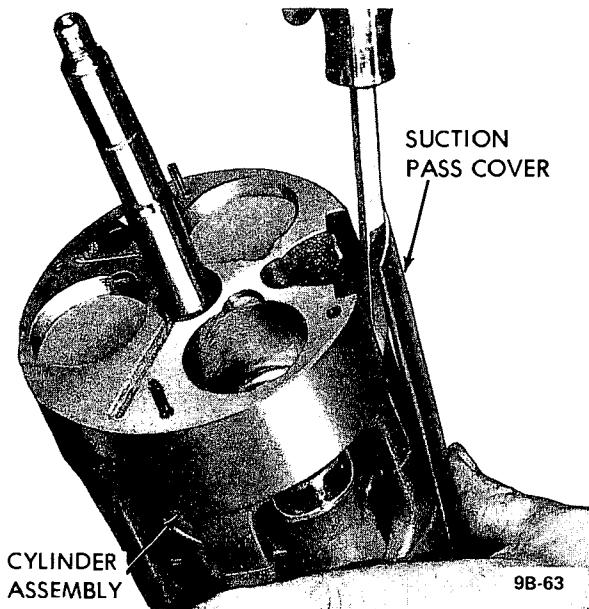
B-88 Removing Suction Pass Cover - 6 Cylinder Compressor
